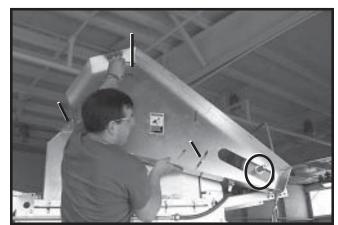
Placing top auger belt guard body over (3) bolts (arrows), with cutout centered on load motor drive shaft (circle.)
